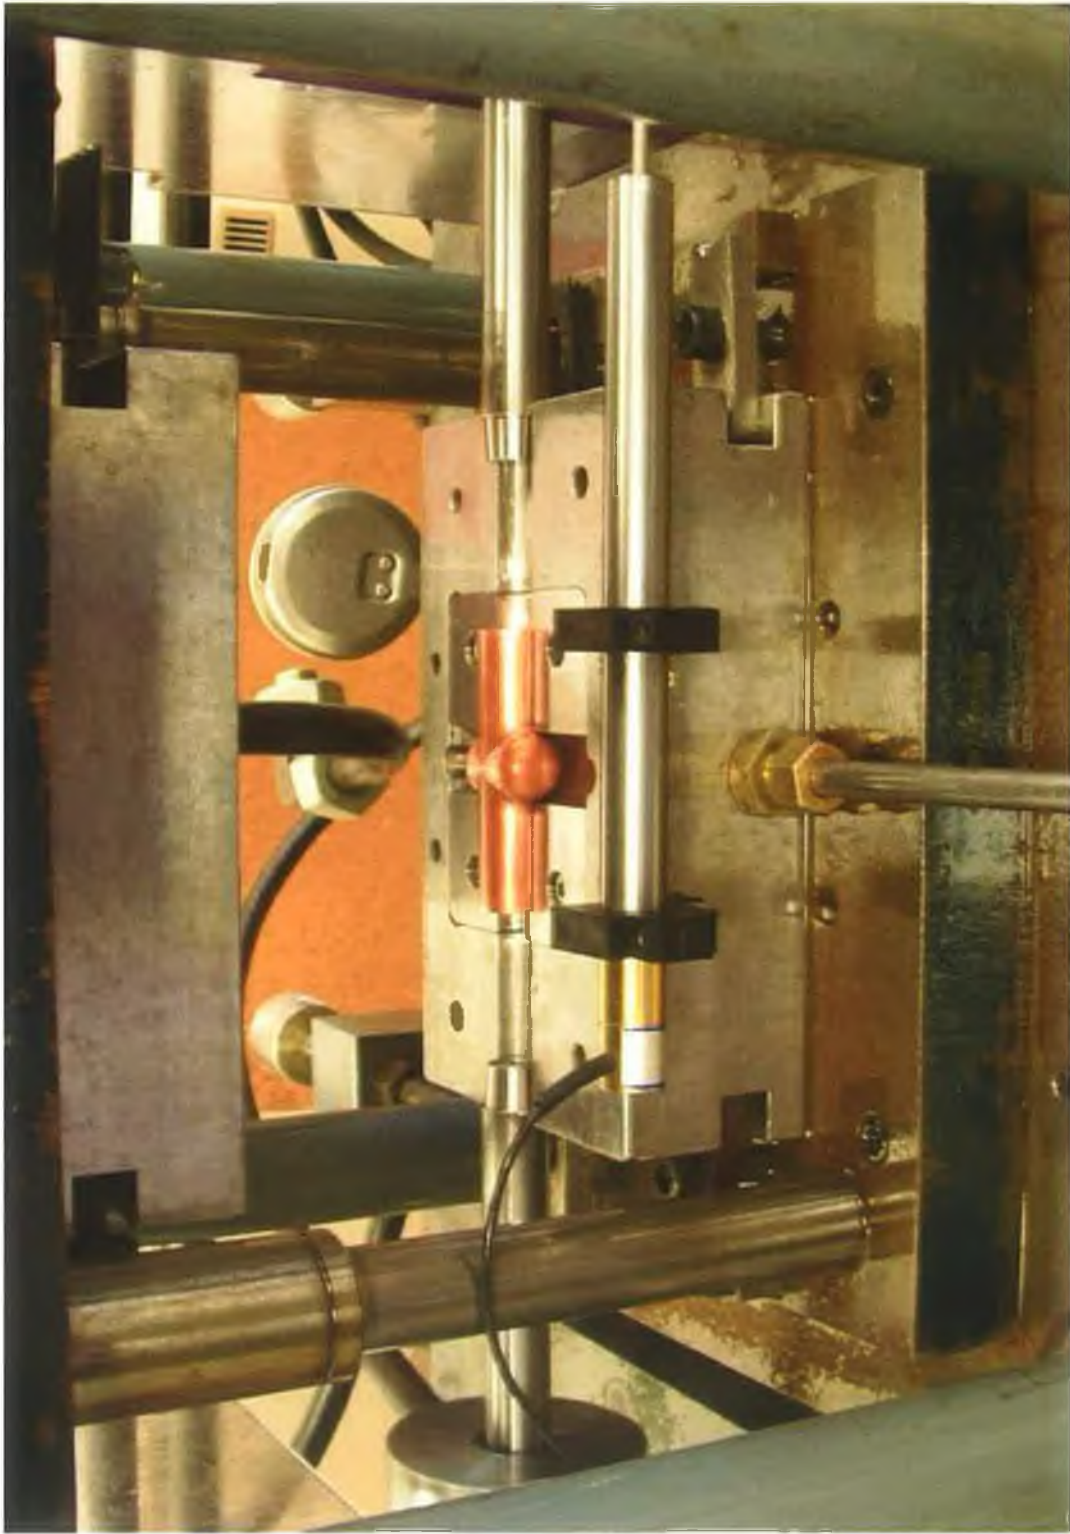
X-branch hydroformed component (sample of the formed tube in the die cavity)
